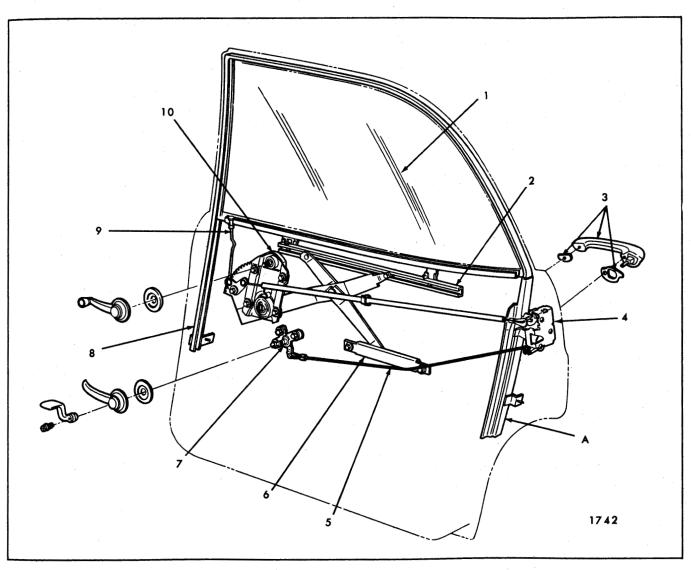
Rear Door Hardware - "B" Closed Styles
